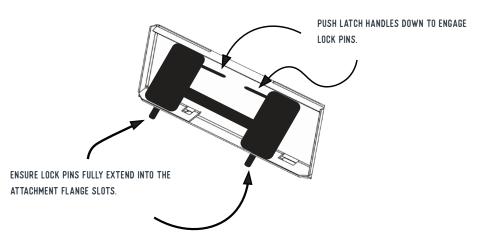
B QUICK ATTACH MECHANISM LOCKED TO ATTACHMENT PLATE
